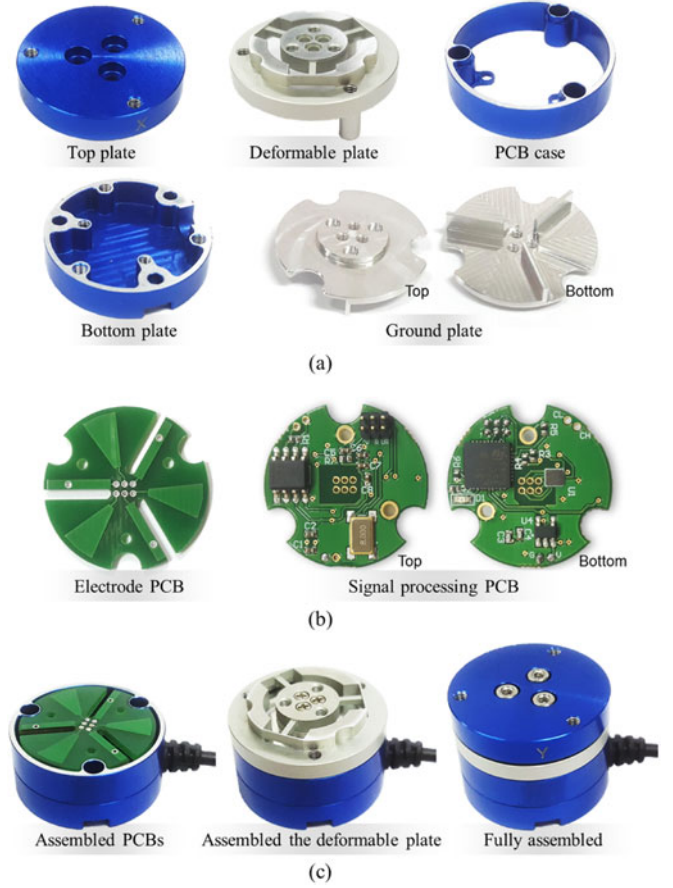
Manufactured six-axis F/T sensor. (a) Manufactured mechanical parts. (b) Manufactured PCBs. (c) Assembly process of the developed sensor.
